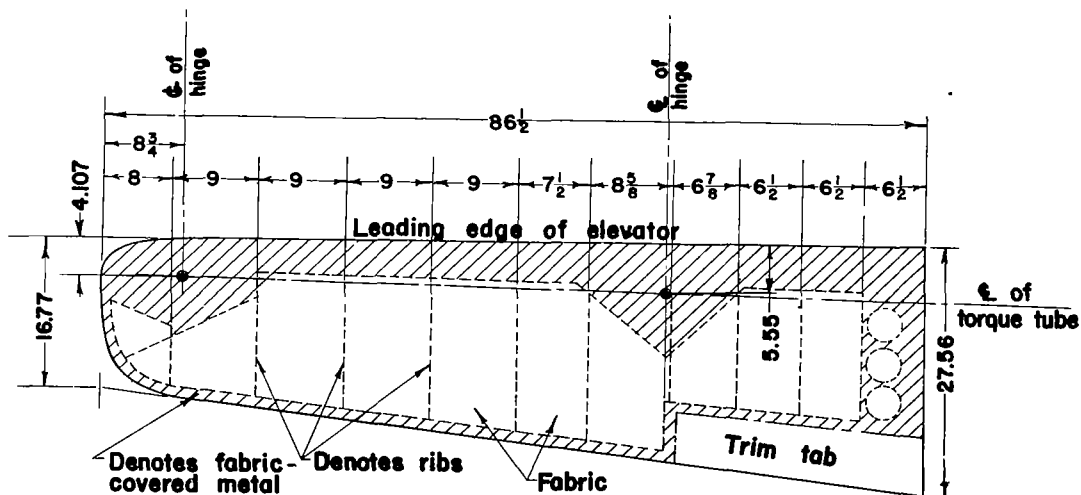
DETAIL OF ELEVATOR AND SEAL.
